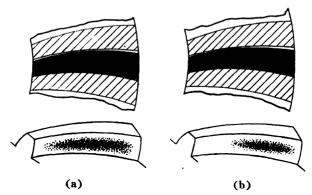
Localized Tooth Contact Effects of displacement on lengthwise position of tooth contact
